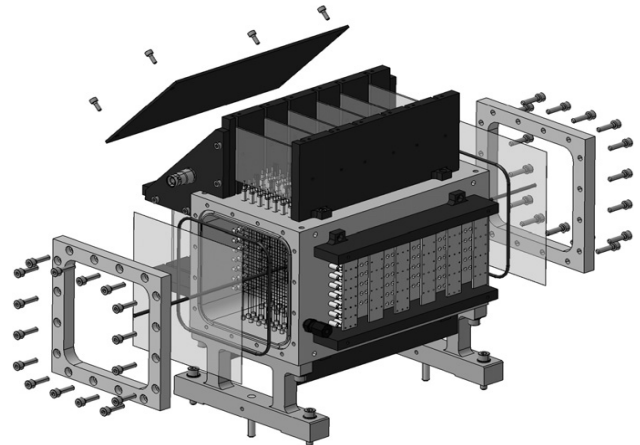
Technical drawing of the Beam Monitor Drift chamber.
